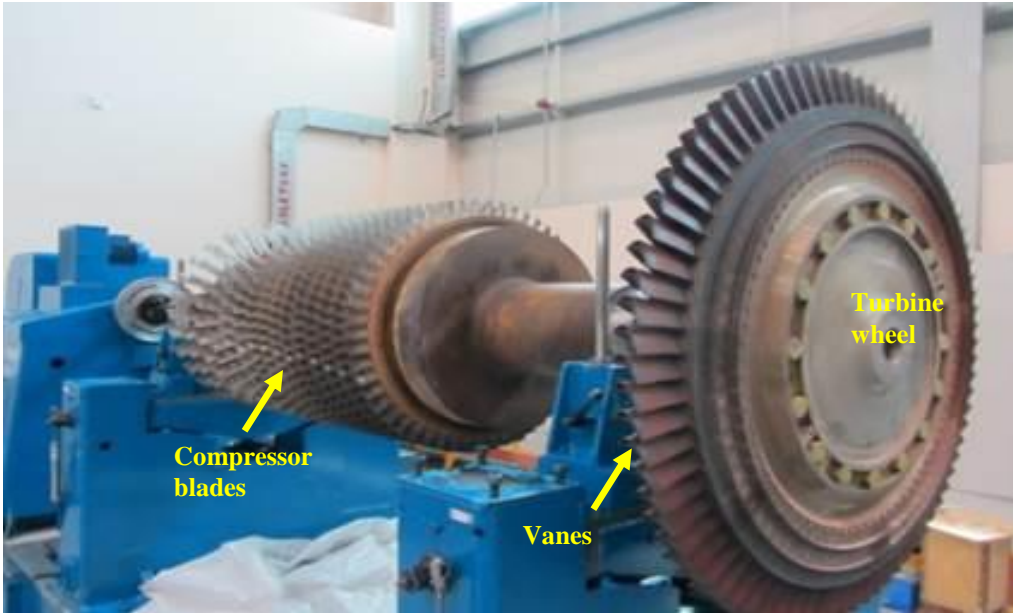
A Frame 5002 rotor assembly (Source: Masaoood John Brown Rotor Workshop, Dubai)
